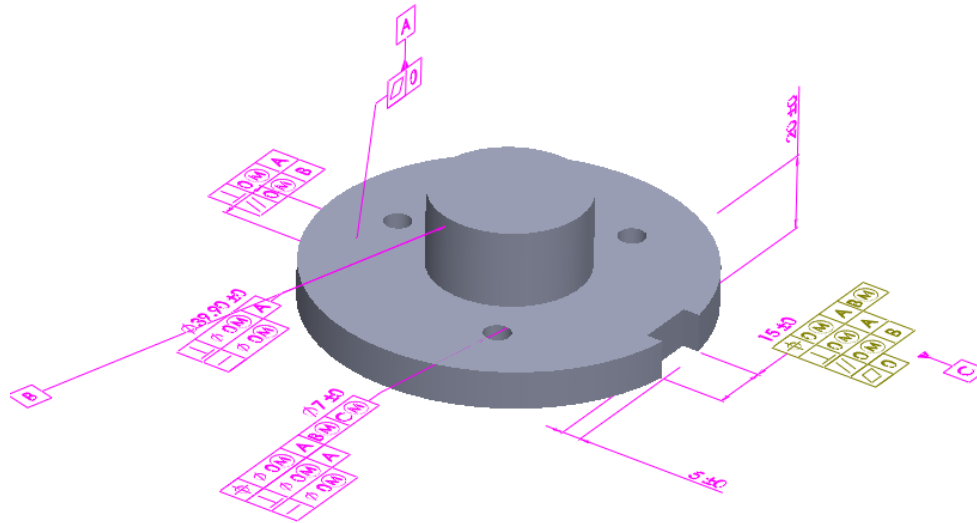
40: Right Support with Form Tolerance Frames Added
